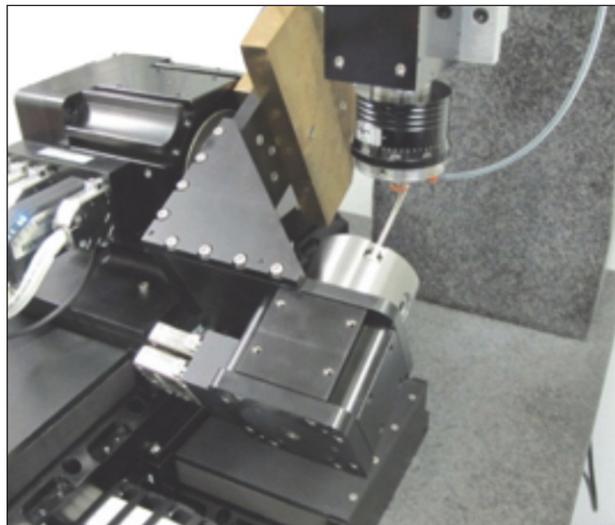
Interior of 5 axes multi-axis laser fusion cutting system
